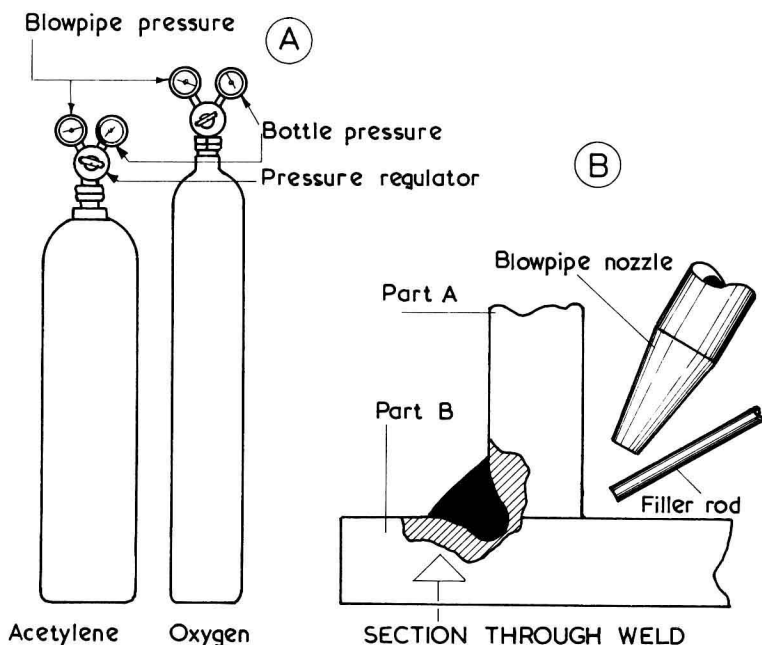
Principle of oxy-acetylene welding
